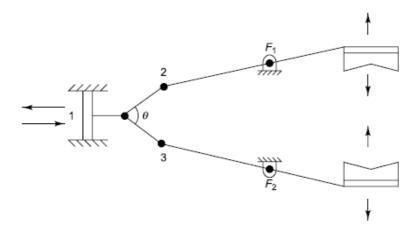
is another example of swinging gripper that uses the piston-cylinder. This is the swing-block mechanism. The sliding rod 1, actuated by the pneumatic piston transmits motion by way of the two symmetrically arranged swing-block linkages 1-2-3-4 and 1-2-3'-4' to grasp or release the object by means of the subsequent swinging motions of links 4 and 4' at their pivots  $F_1$  and  $F_2$ .
